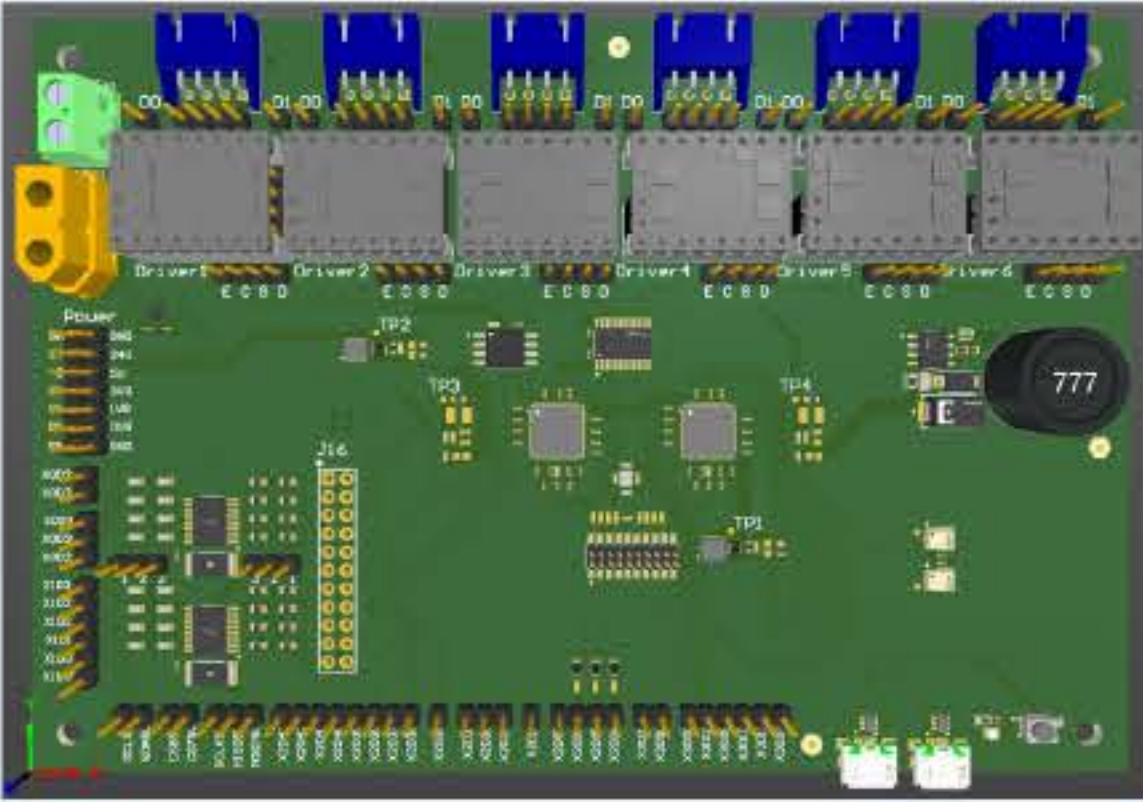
3D Render of the PCB in Altium Designer. The top of the PCB consists of the 6 stepper motor driver ports and outputs, which allows the dual 60-pin XCORE.AI packages to drive up to 6 motors at once. The perimeter of the board also includes numerous headers for I/O expansion, two USB ports for external powering and debugging, two SMD microphones, and power supply conversions from 24V to 5V, 3.3V, 1.8V, and 0.9V.
